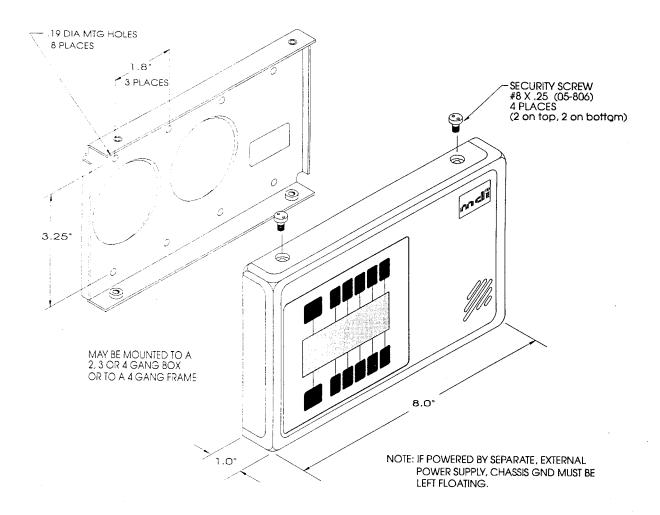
ACU-6 MOUNTING DIMENSIONS
